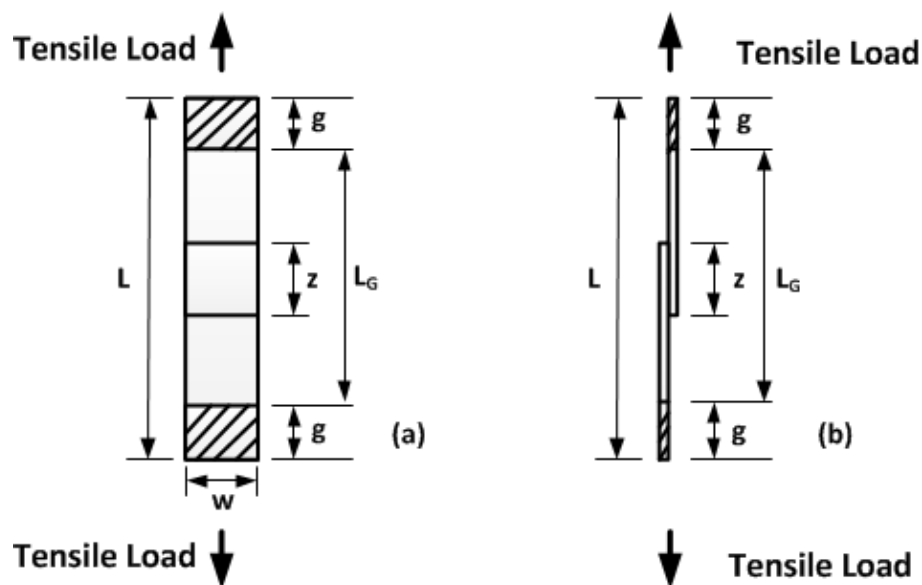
Sketch of the bonded carpet joint specimens: (a) Front-view and (b) Side-view
